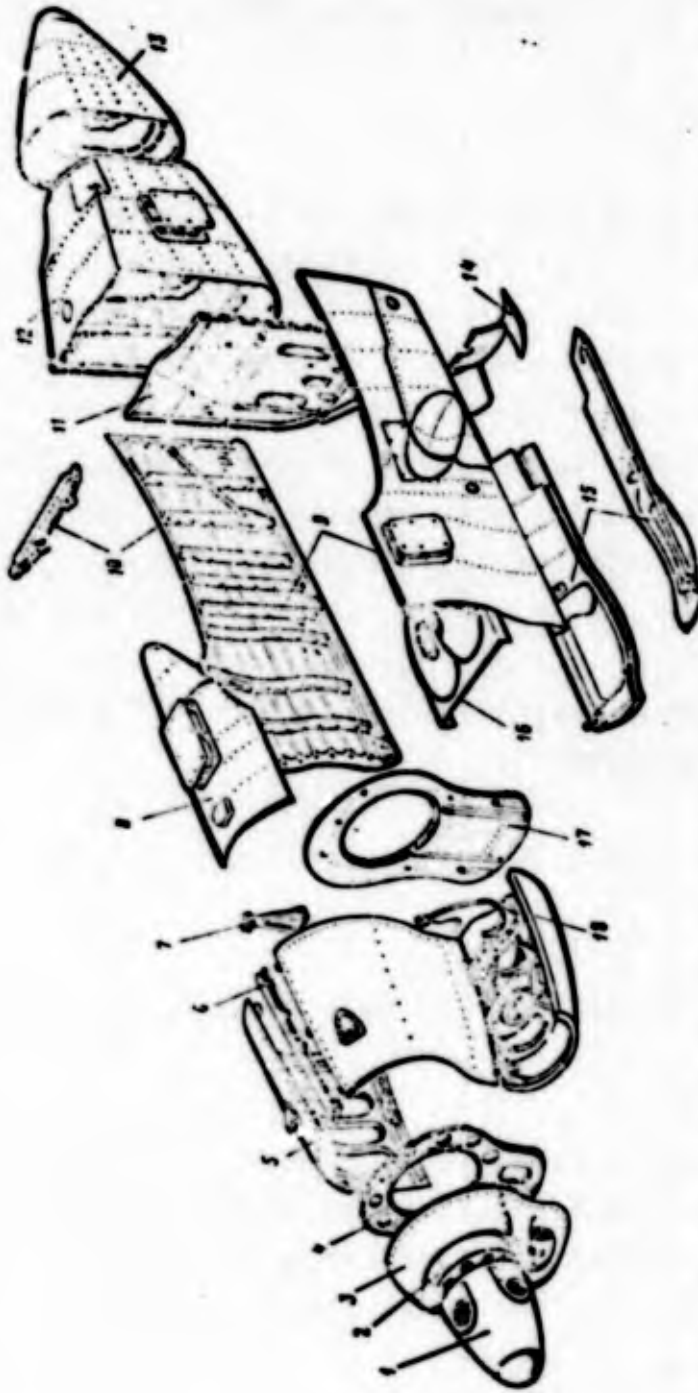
Design of a turboprop engine nacelle: 1 - propeller hub; 2 - reducer fairing; 3 - engine air intake; 4 - air intake frame; 5 - side cowl cover; 6 - upper beam; 7 - cowl attachment bracket; 8 - upper panel; 9 - side panels; 10 - horizontal and vertical beams of the middle load-bearing frame; 11 - rear load-bearing frame; 12 - forward compartment of rear section of the nacelle; 13 - fairing; 14 - split flap with cover; 15 - landing gear door; 16 - landing gear wheel screen; 17 - front load-bearing frame; 18 - lower cowl cover.
